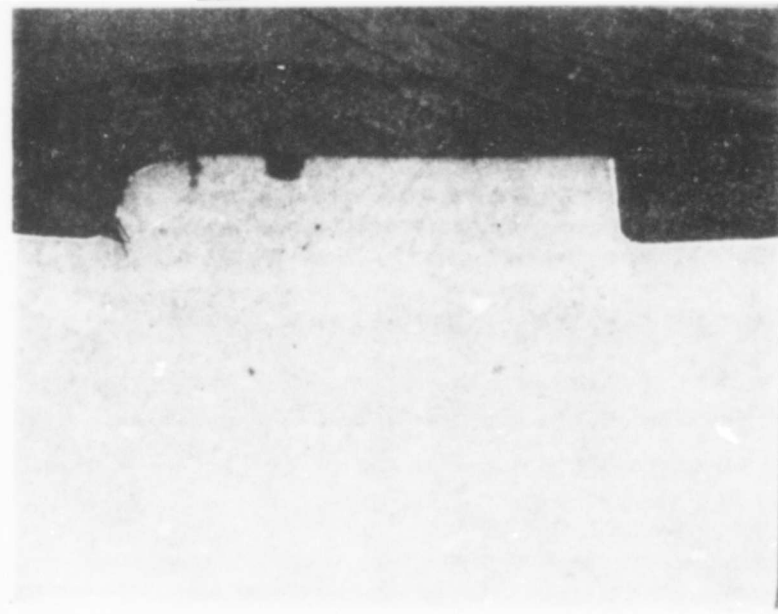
Tube S.N.53; Section 1; 9 o'clock.
